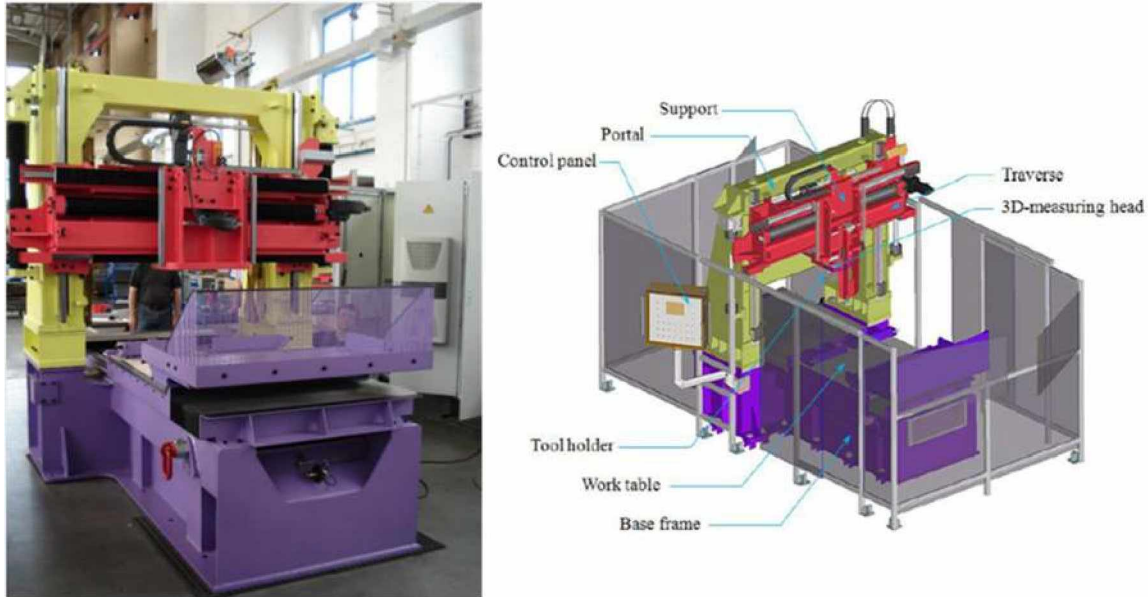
Cutting Machine HXS 1000-50 (left) and 3D model (right) [7, 8]
